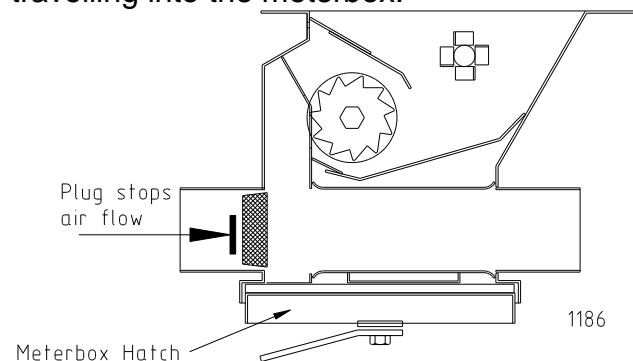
Meterbox Cross Section on a Rear Tow Air Seeder. Reverse the plug location on Front Tow Seeders.
